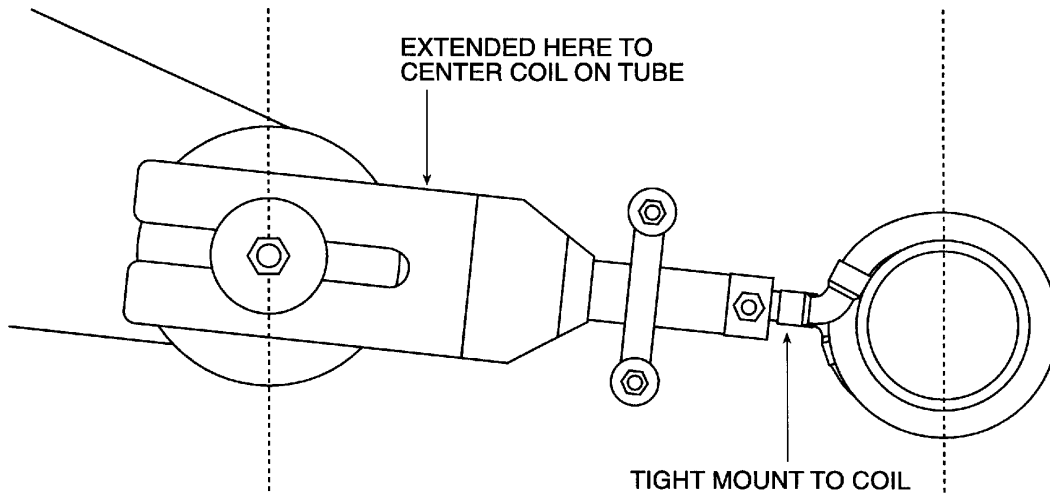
How to Mount the Coil Holder on the Welder's Nose Piece
